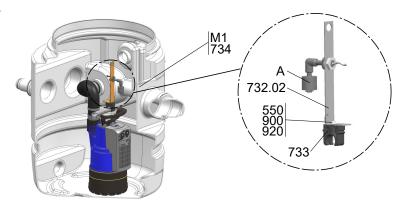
Installation drawing, AmaDrainer 303, 322, 354
